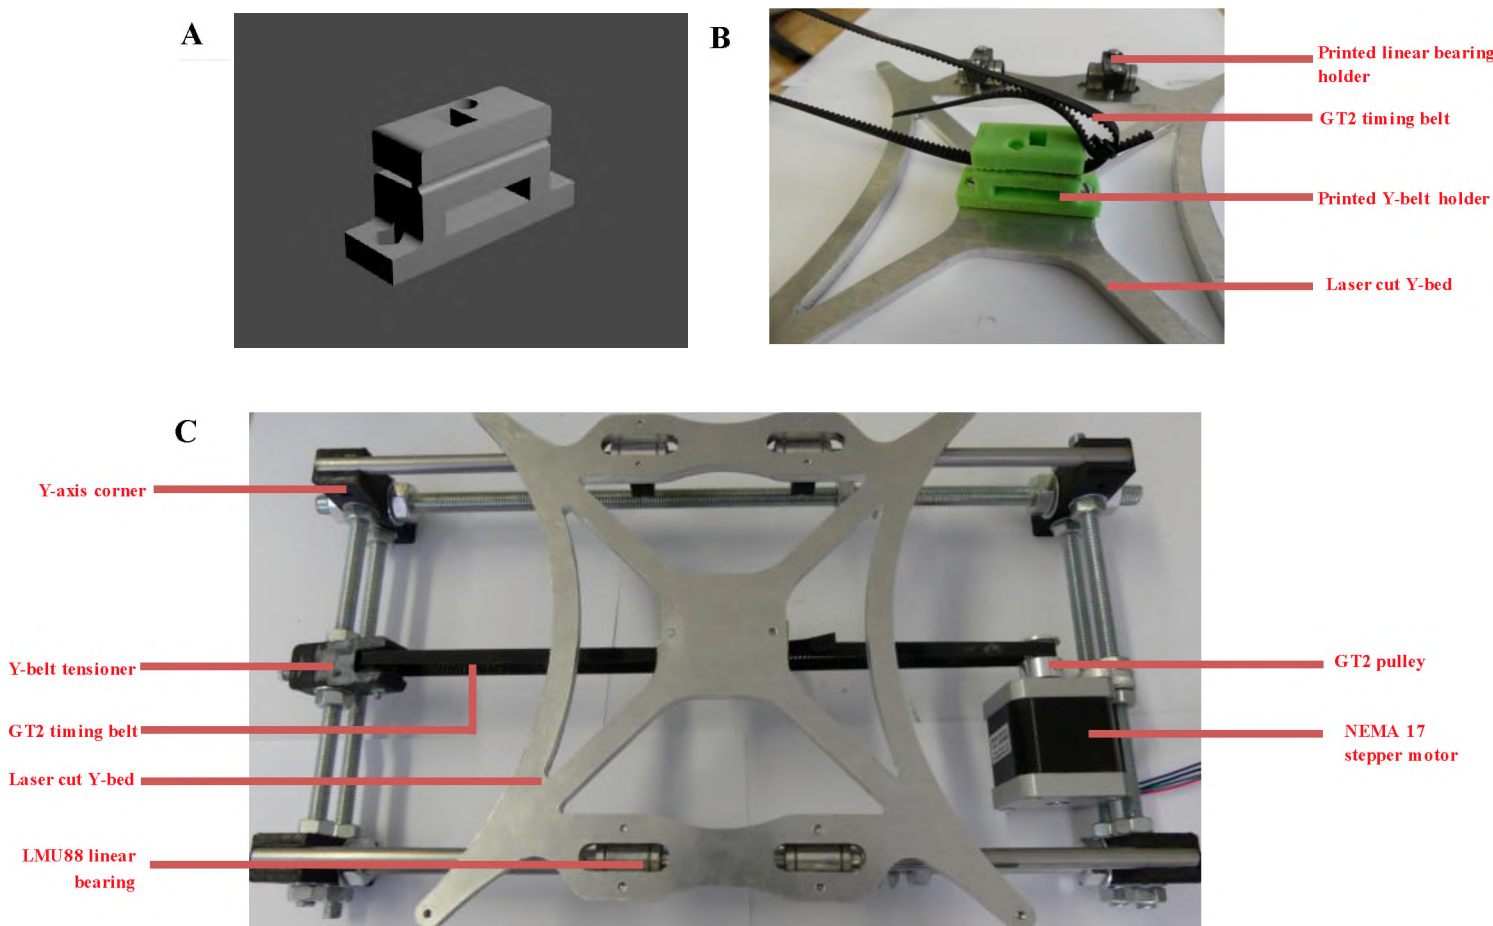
Merging vertical and horizontal frame to Y-bed A: Printed Y-belt holder. B: Y-axis belt fixed to printed belt holder. C: Fully assembled Y-axis
